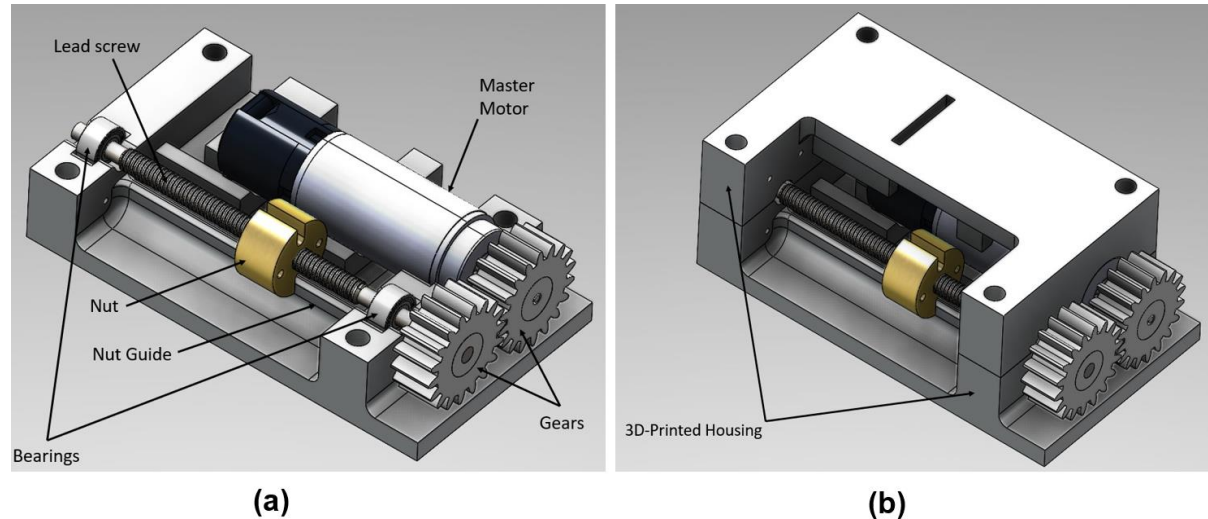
Master System Linear Actuator Final Design – Solidworks Assembly.
